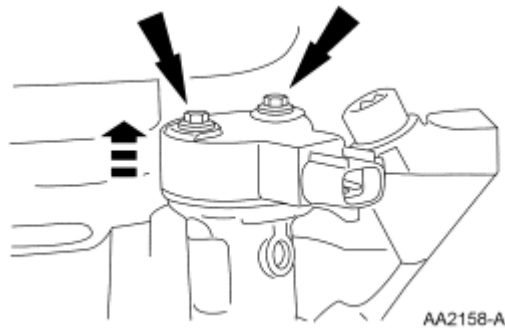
Locating Screws & Camshaft Position (CMP) Sensor
